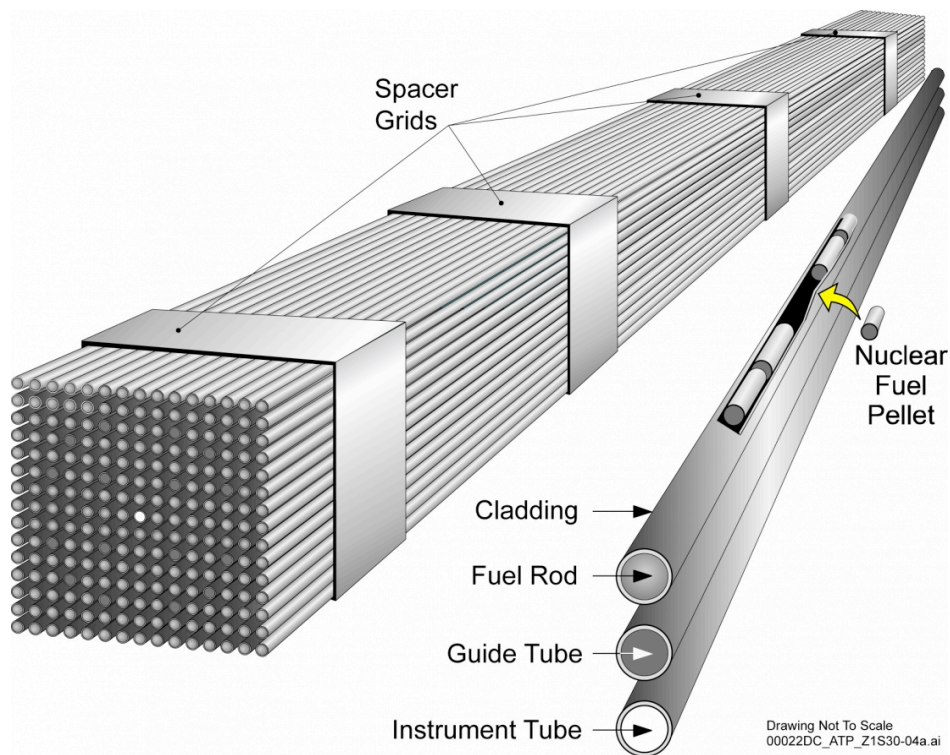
Fuel assembly containing nuclear fuel rods that are filled with fuel pellets [11].
